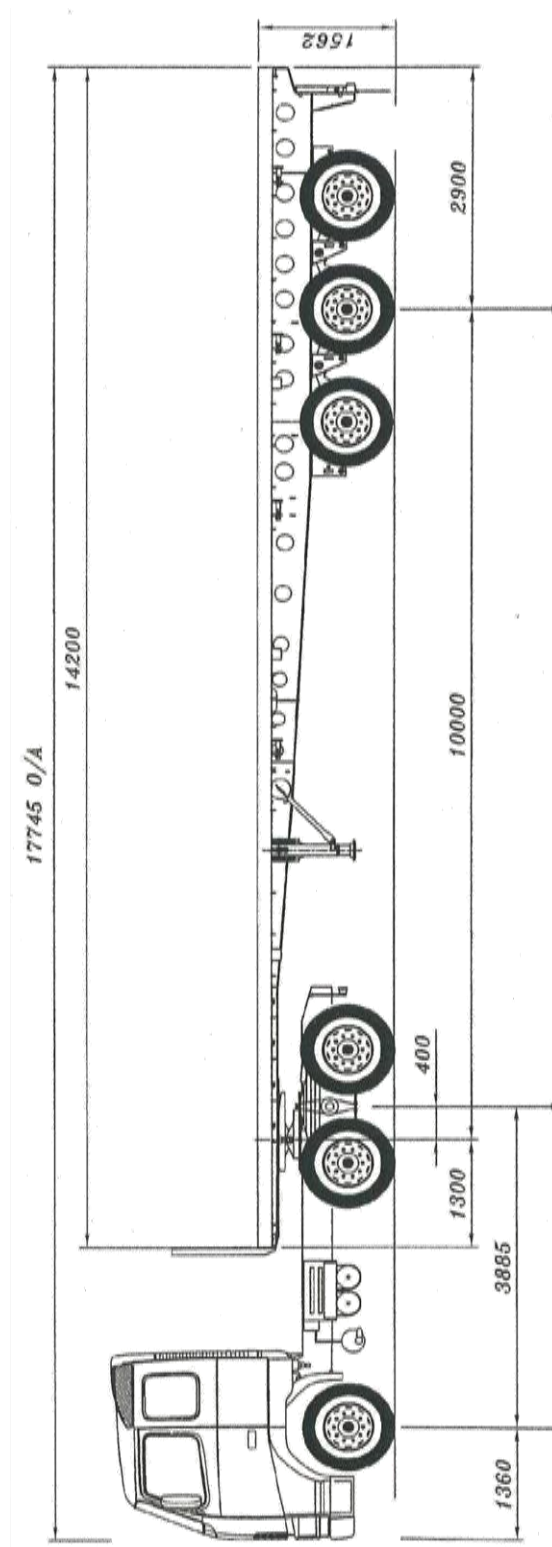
Layout dimensional drawing of OECD 1 semi-trailer
